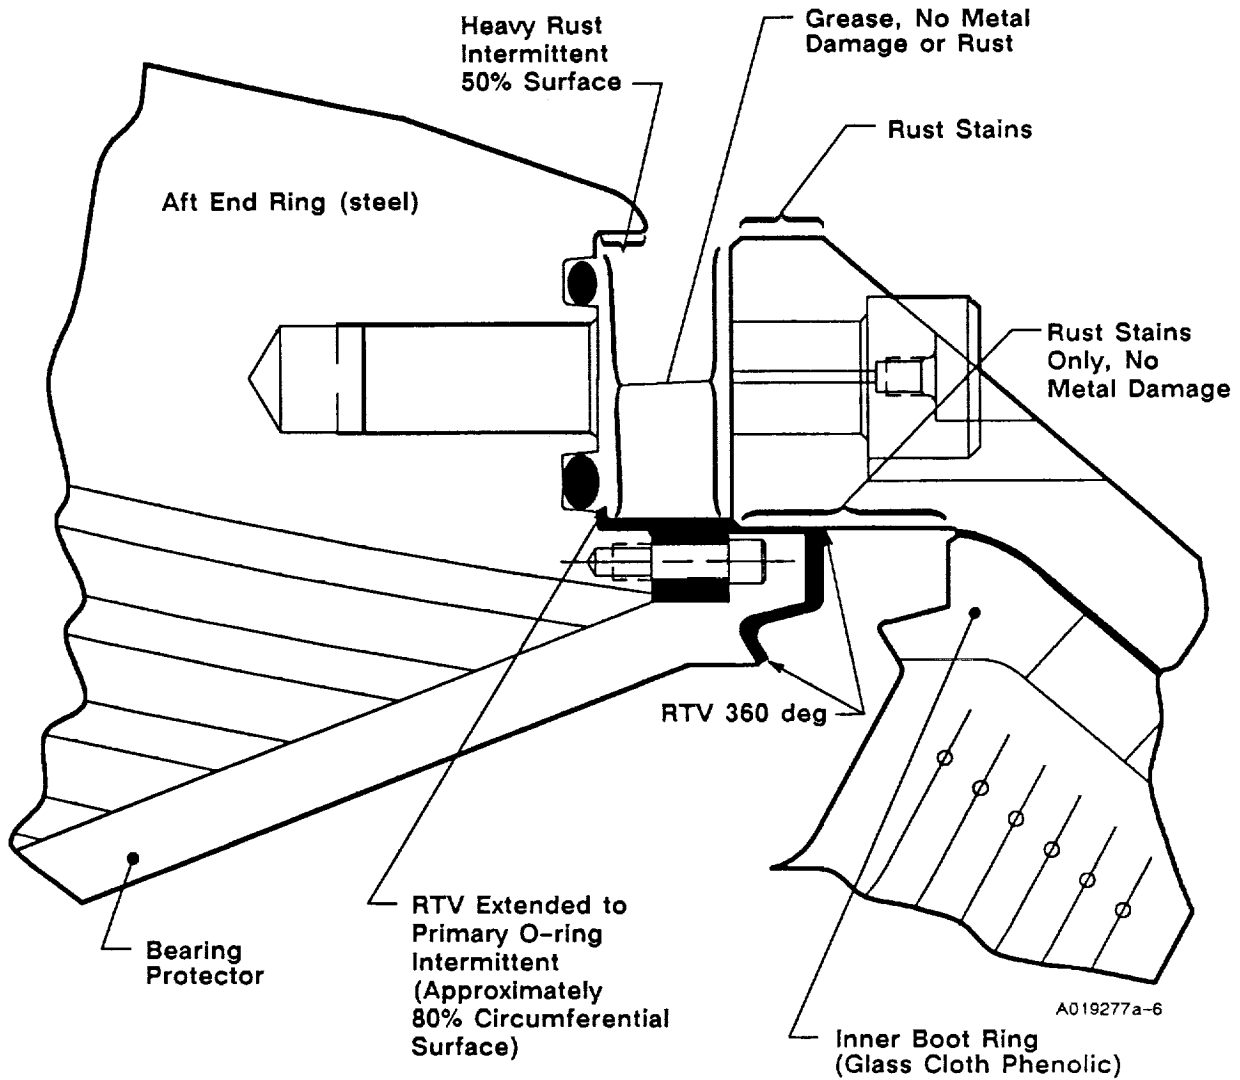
STS-28B-Flex Bearing/Fixed Housing Joint (Joint #5)
